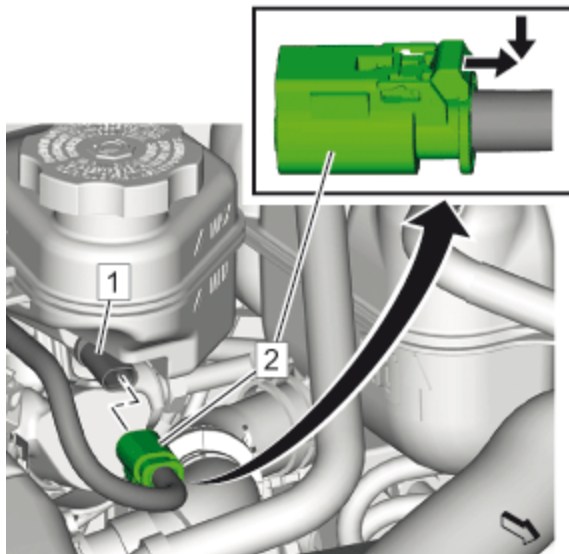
Electrical Connector And Brake Fluid Level Sensor
